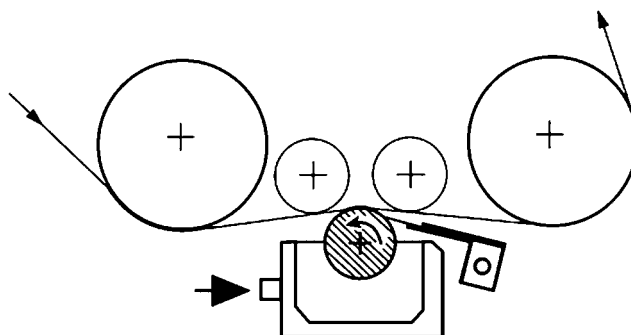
Side view sketch of Micro-Gravure™ coating head. Courtesy of Yasui-Seikei.
